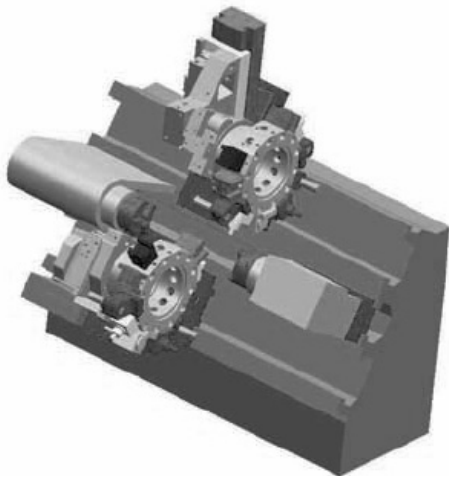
Basic structure of horizontal lathe with two revolvers and auxiliary spindle
